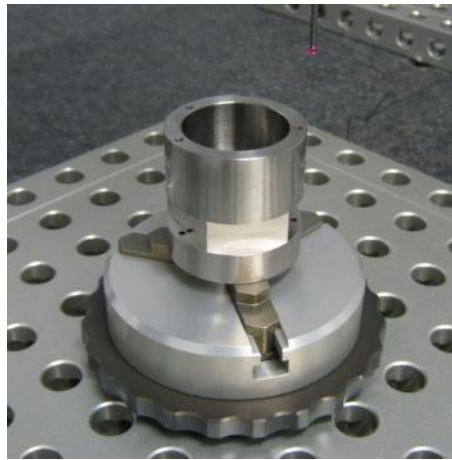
Measurement setup of multi cross-section workpiece on the CMM.
